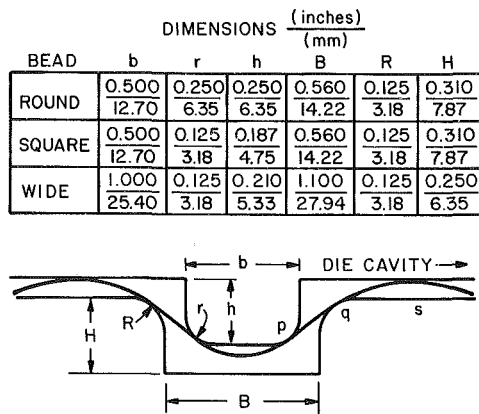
Drawbead dimensions and sheet position at locked condition (typical). Critical locations on bead are shoulder of male bead (p), shoulder of female bead (q), and binder surface (s)
